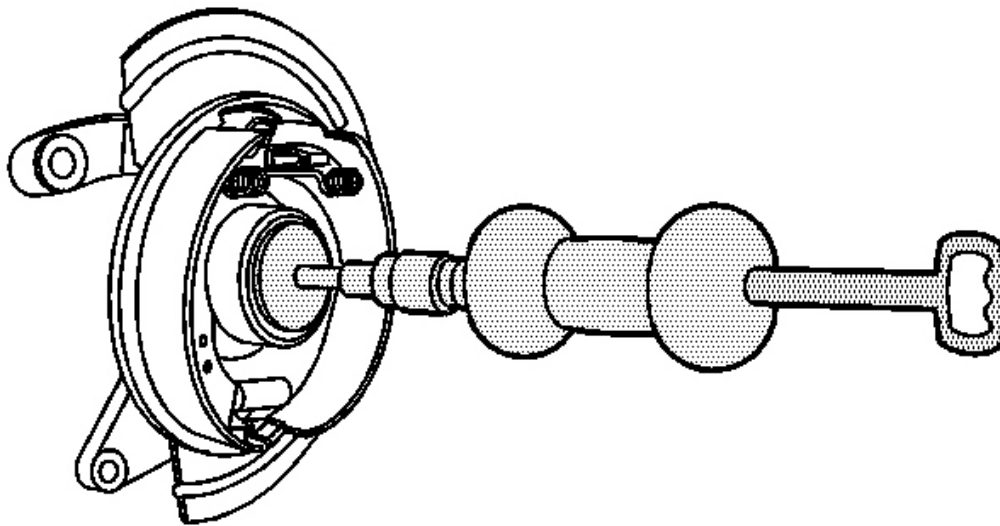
Removing Axle Shaft Seal & Bearing From Axle Housing Using J 2619-01 & J 44685
